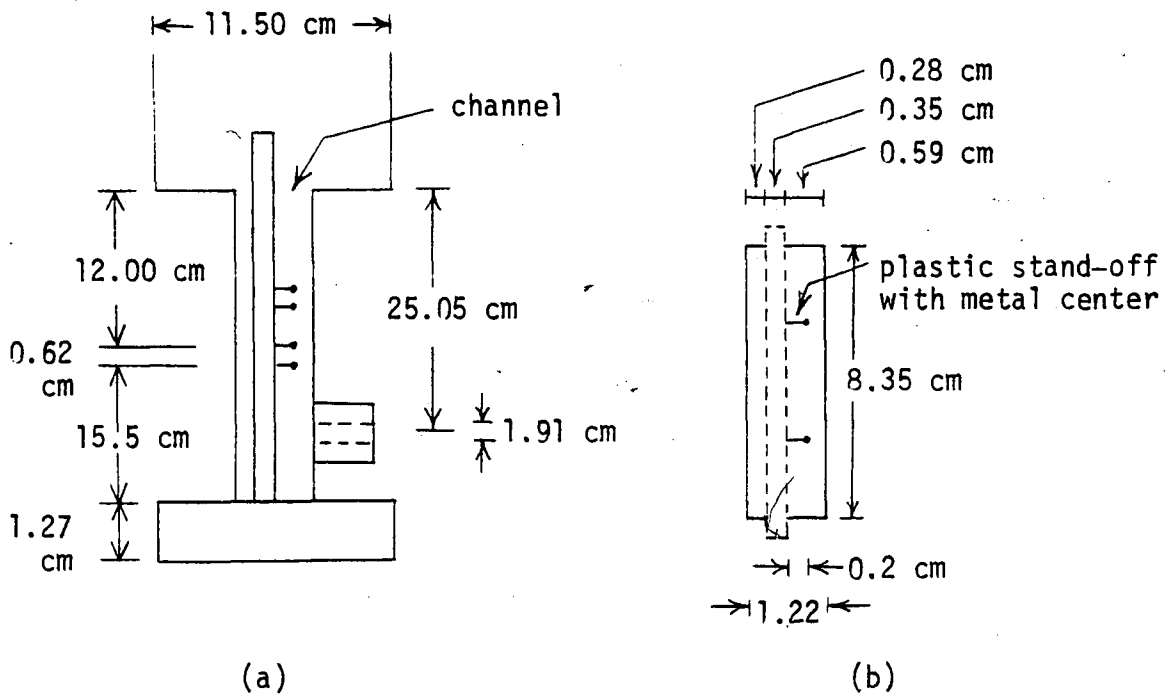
Pertinent dimensions of tower and sliding panel:
